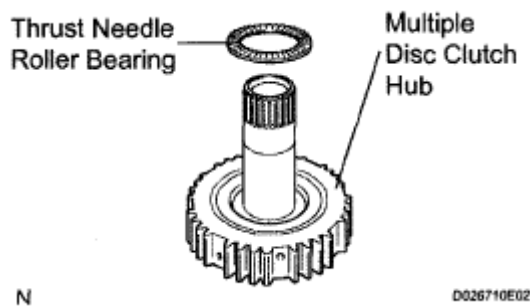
Identifying Thrust Needle Roller Bearing And Multiple Disc Clutch Hub
